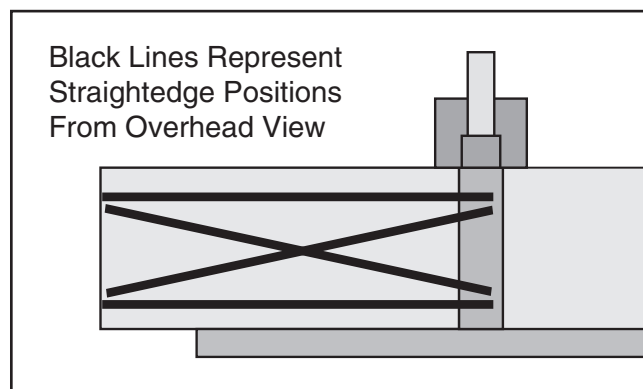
Straightedge positions for verifying if outfeed table is parallel with cutterhead.
